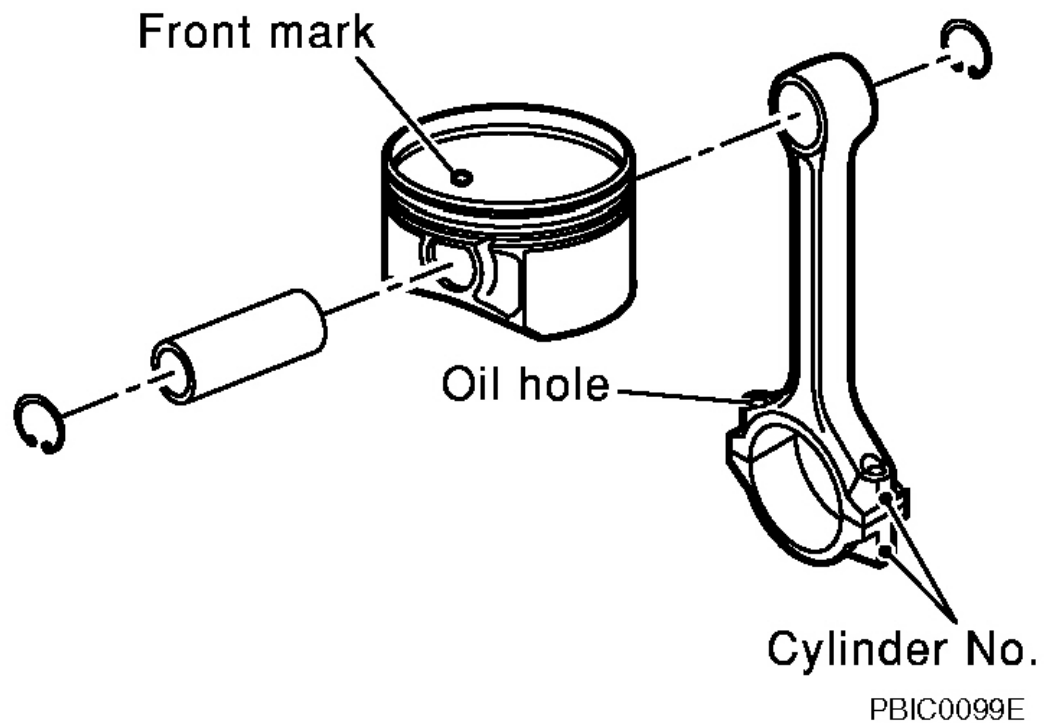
Positioning Front Mark On Piston Head And Oil Holes
